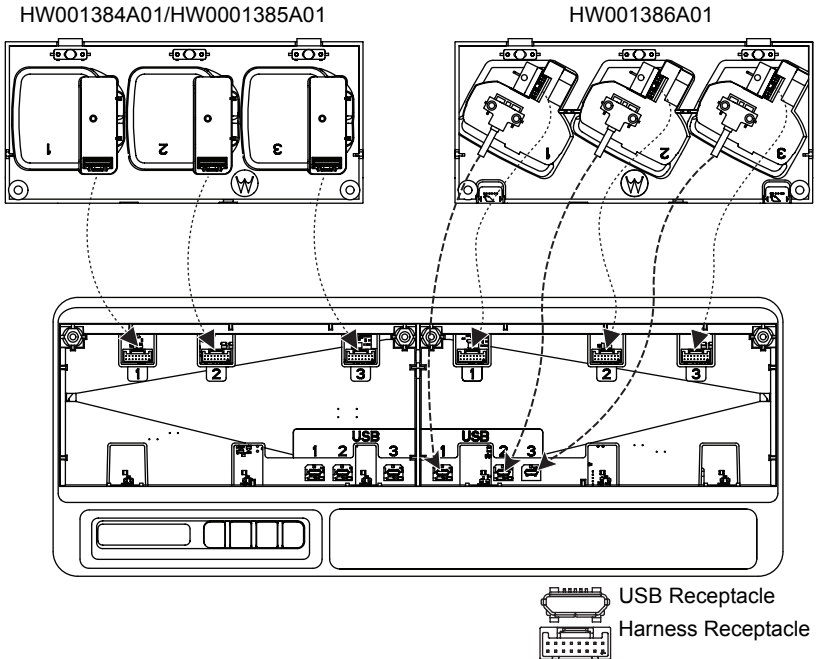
Securing HW001384A01/HW0001385A01/HW001386A01 Charging Pockets to Multi-Unit Charger Base
